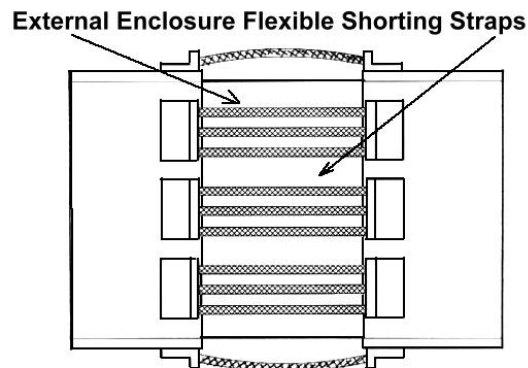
Expansion joint straps are welded to the enclosure in this design.
